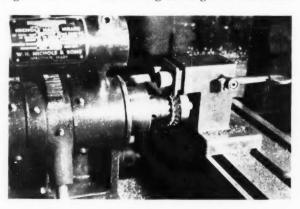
Chamfering the edges of the center plate to remove burs. Operation performed on Nichols hand miller.
